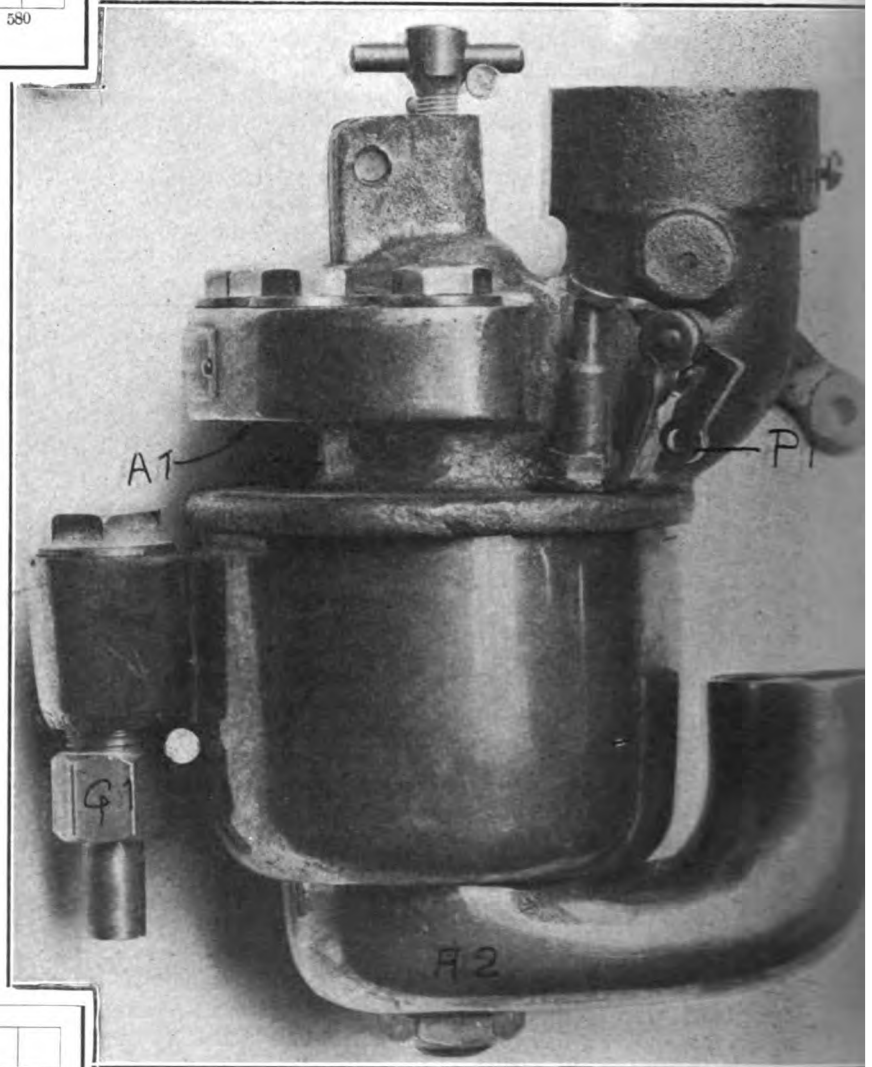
Illustration of one side of the carbureter, showing the location of the priming mechanism
